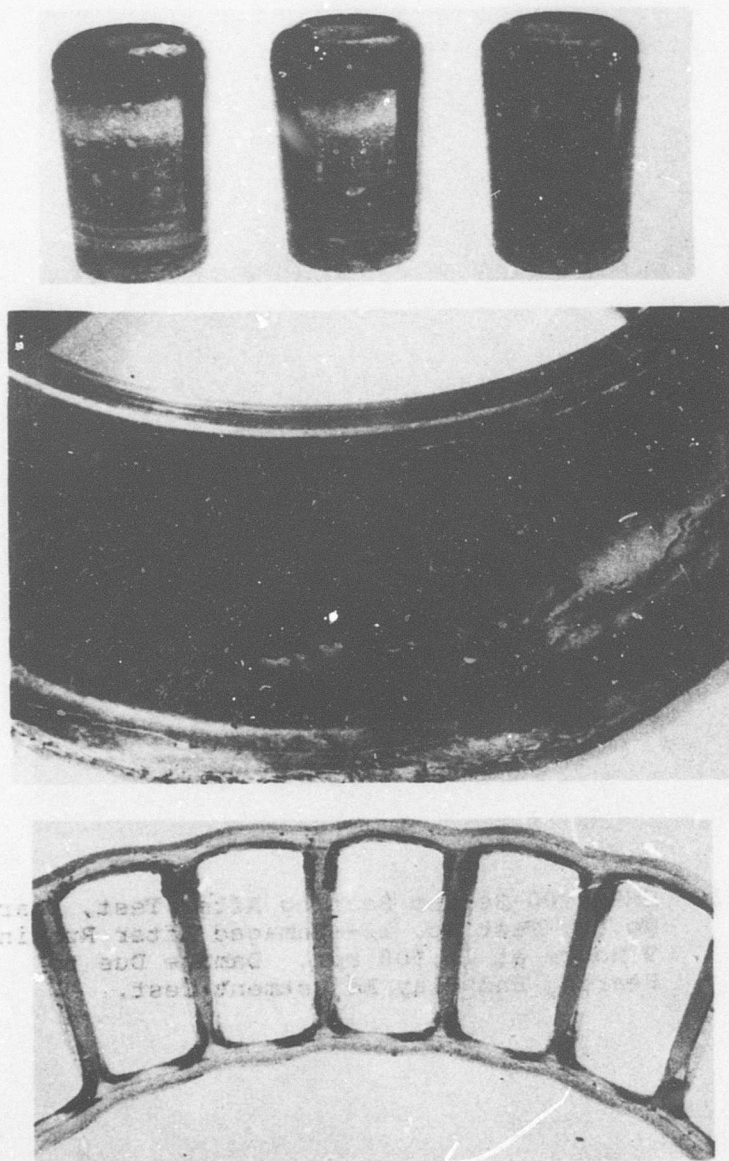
HM926700-Series Bearing After Test, Bearing No. 7, Test Nos. 12 through 17--Damaged After 22 hours at 11,500 rpm.
